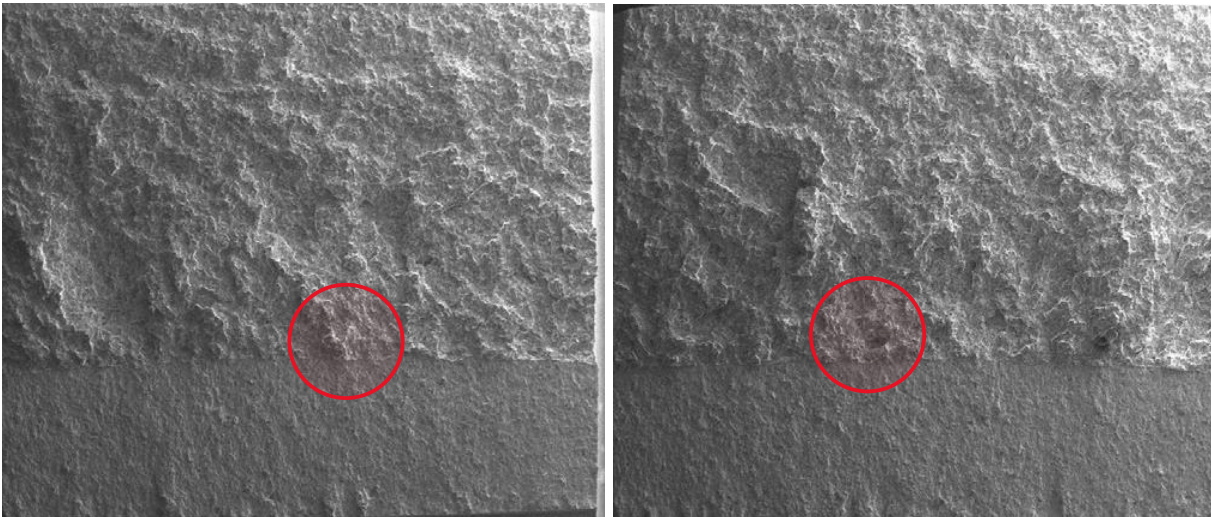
Left and right fracture surface of irradiated SE(B) specimen C22L, manufactured from a CVN specimen, showing predominantly cleavage fracture. The approximate primary cleavage fracture initiation region is marked by a red circle. The surface roughness indicates a K_{Jc} value around 100 MPaVm. The fatigue surface contains some patches of intergranular fracture, but intergranular fracture is not visible in the cleavage fracture region. Fatigue crack growth is controlled by a strain accumulation mechanism, and this makes fatigue crack growth more sensitive to grain boundary fracture. Cleavage initiation occurs in a region
